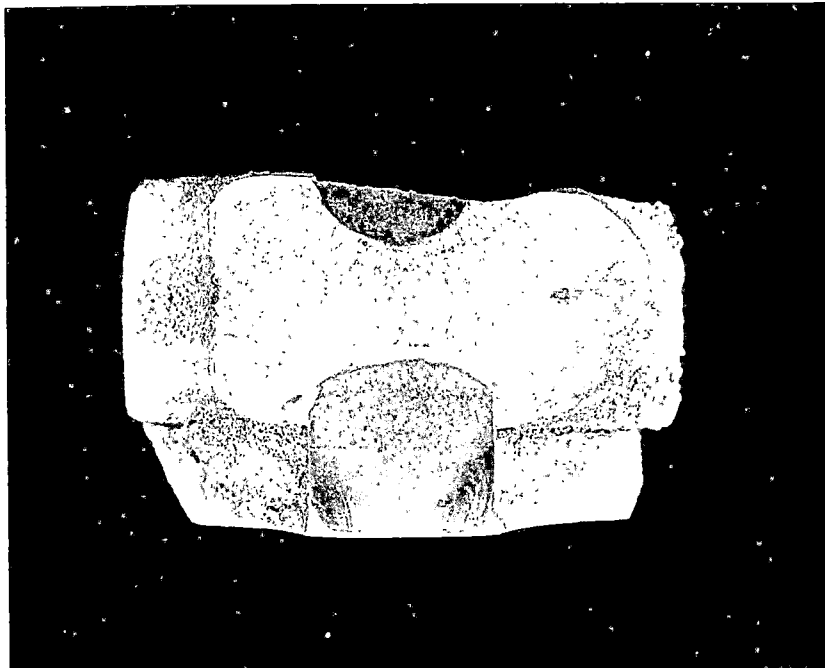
Section taken from the top of #1, showing fusion in the top half.
